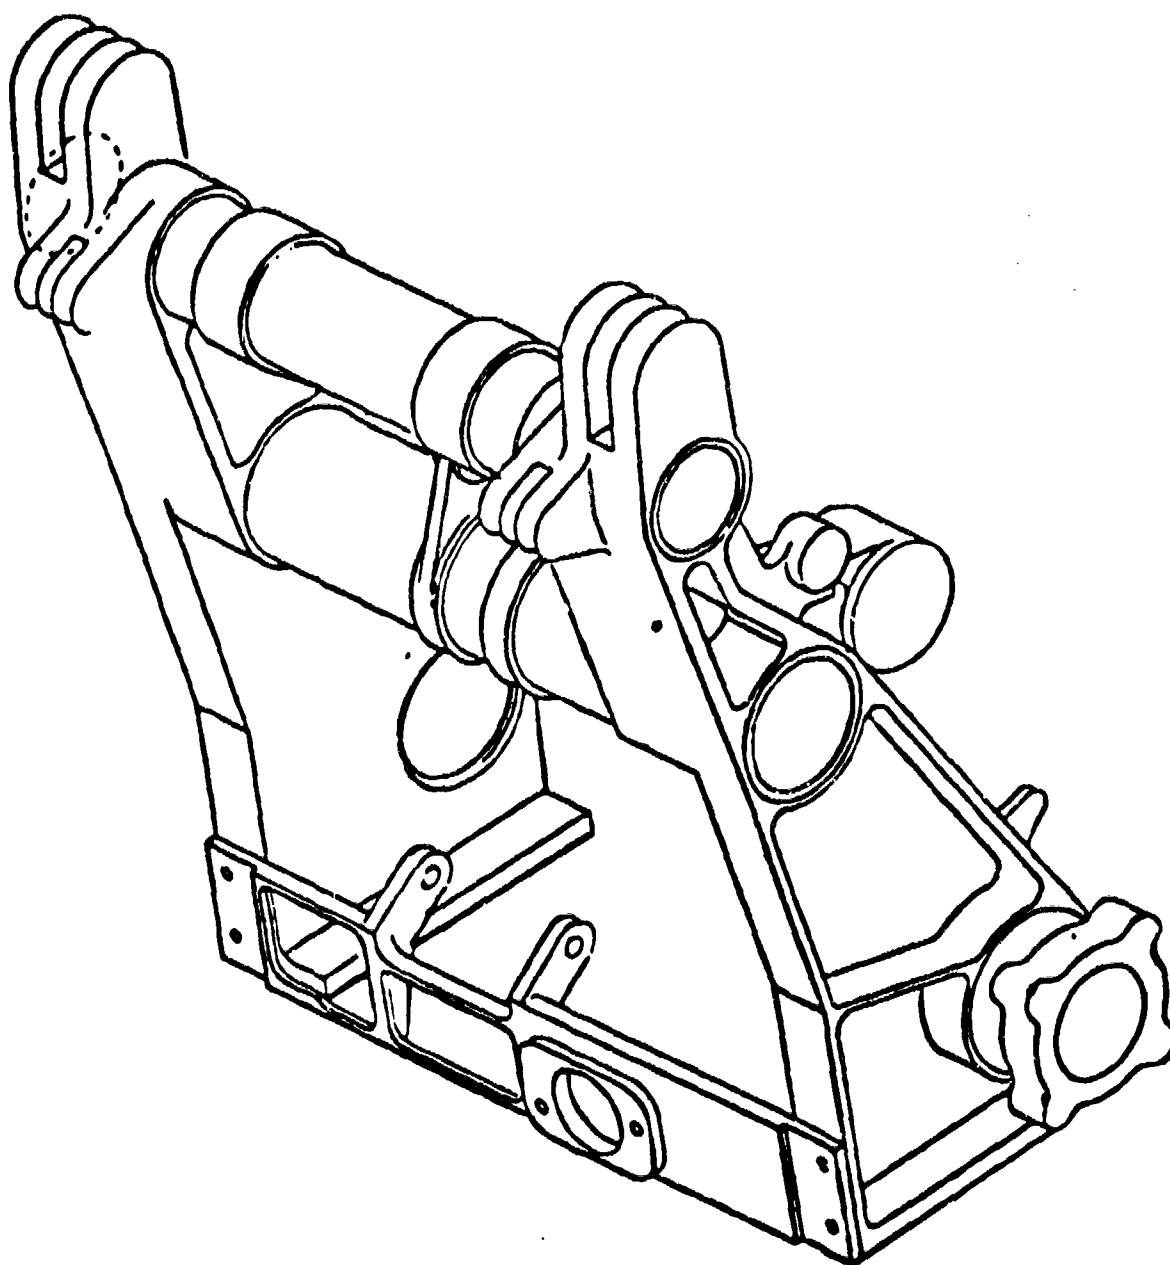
SUPPORT CANOPY MECHANISM ASSEMBLY, DETAIL BUILDUP DESIGN
